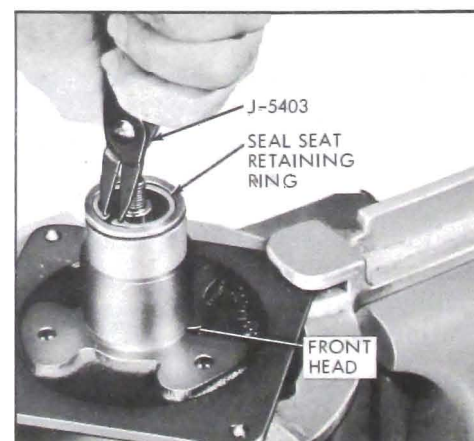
Removing or Installing Seal Seat Retainer Ring
